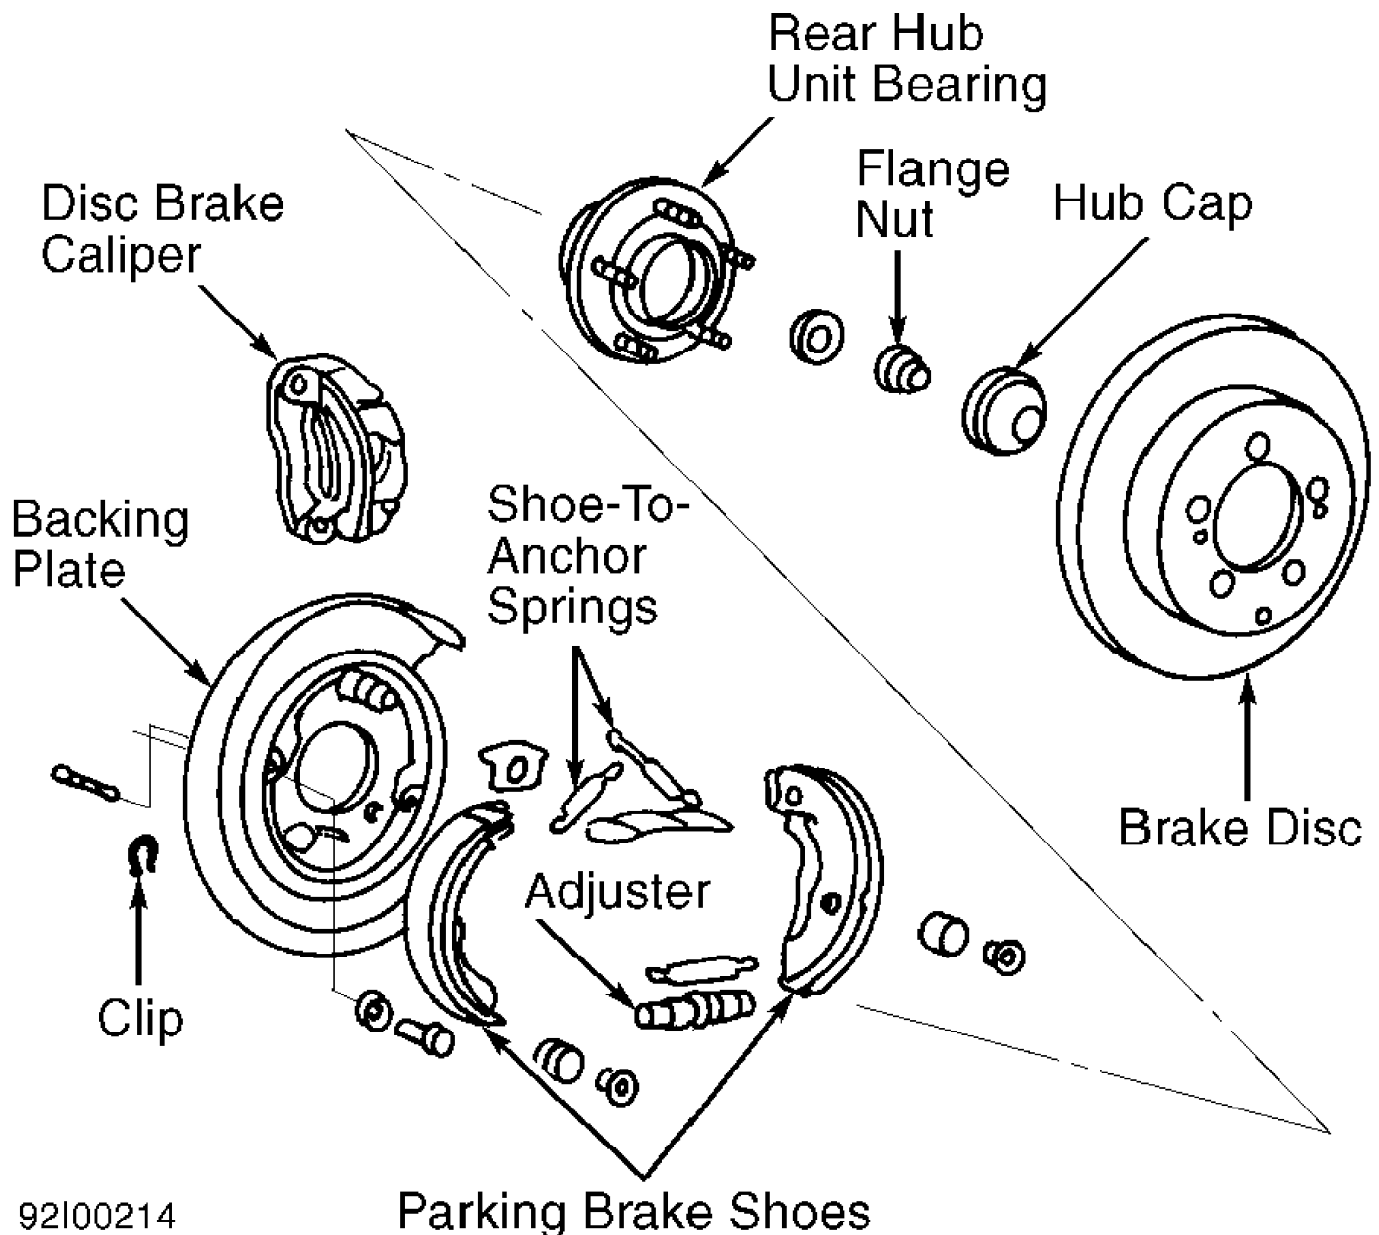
Exploded View Of Parking Brake Assembly (FWD)
